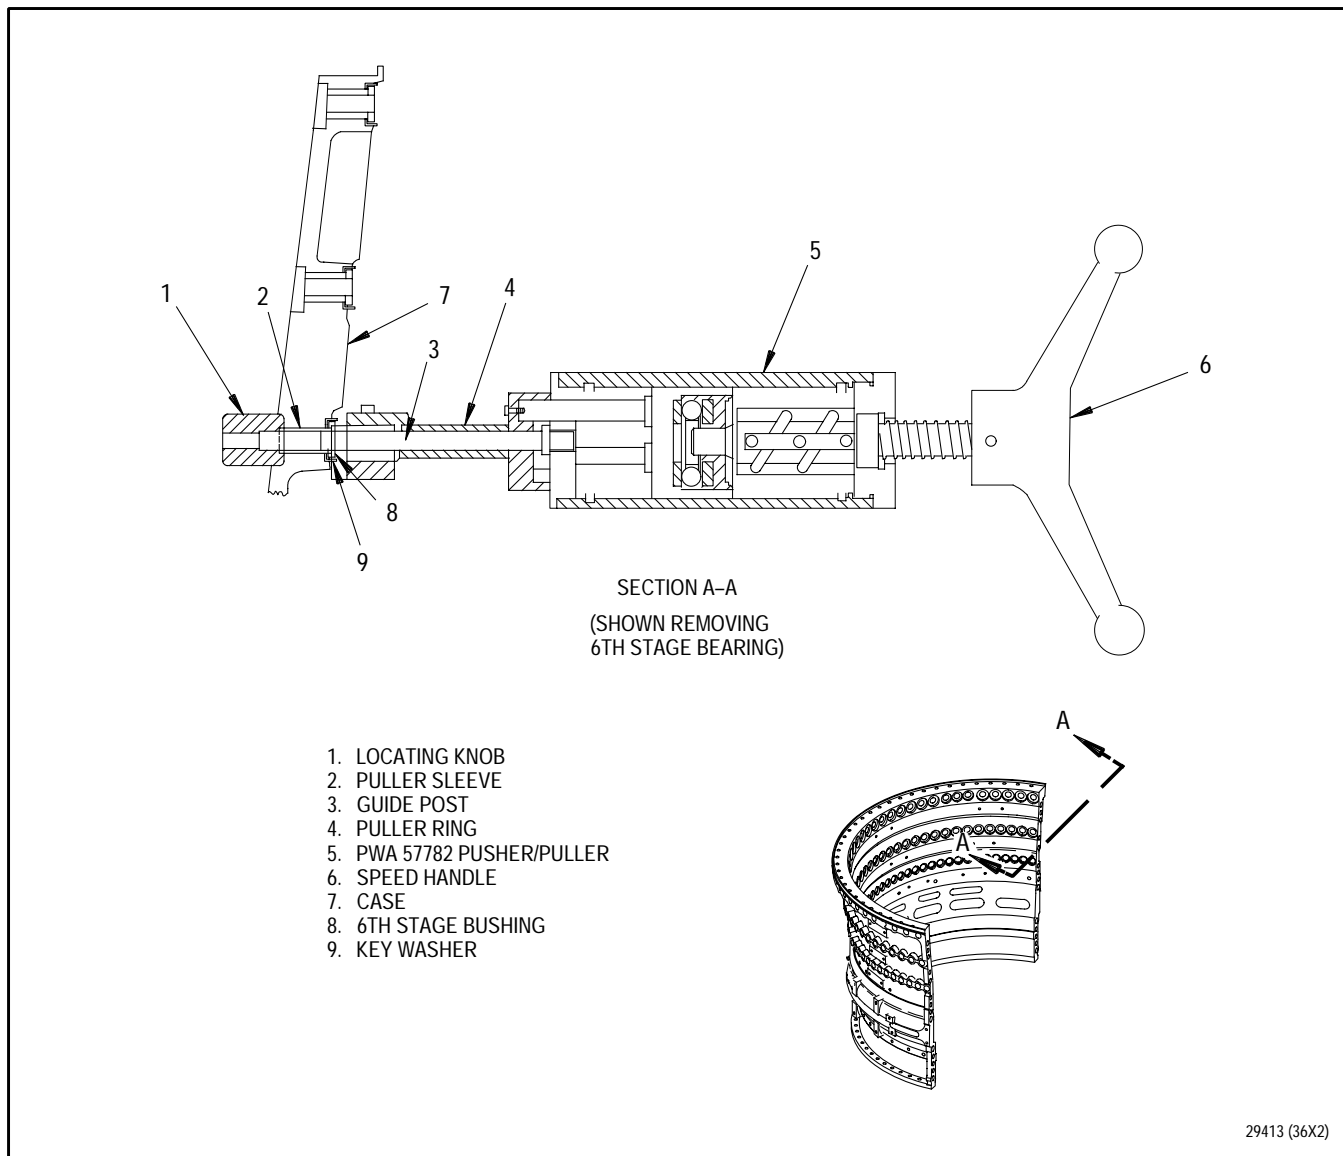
Sixth Stage Compressor Stator Bearing (Bushing) - Removal Using PWA 57782 Pusher/Puller, Detail of PWA 57790
